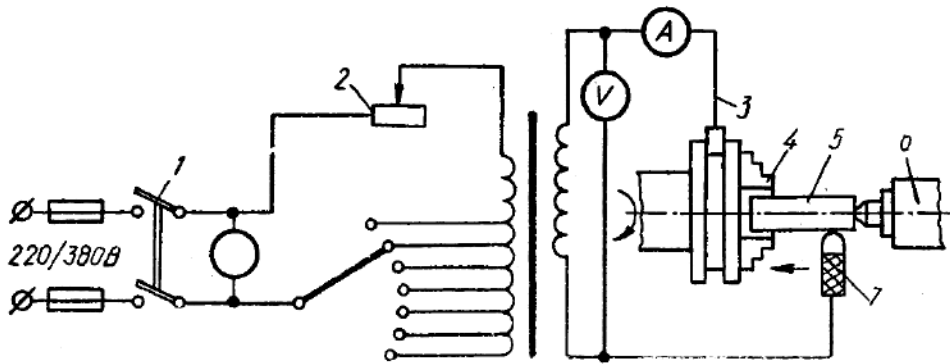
Schematic diagram of the plant for electromechanical processing: 1 – knife switch; 2 – rheostat; 3 – secondary winding wire; 4 – pulling head; 5 – part; 6 – tail block; 7 – processing tool
